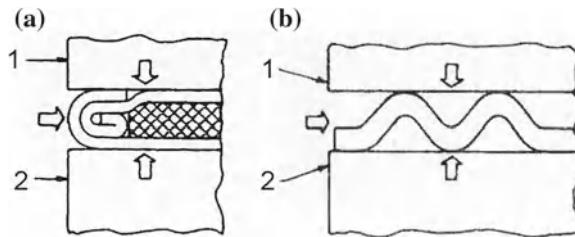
Cylinder gasket between cylinder head (1) and crankcase (2): a rolled steel and armored resin, b completely metallic gasket
